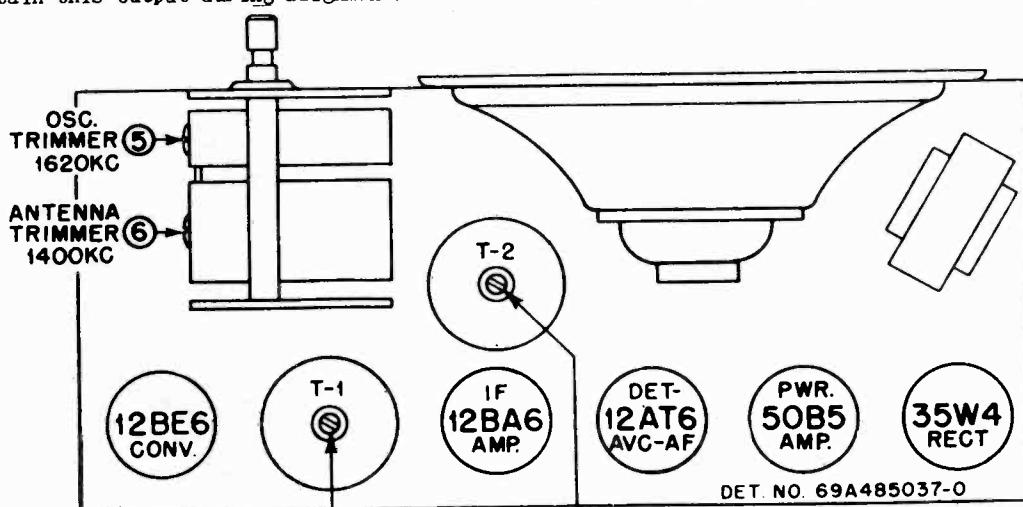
CHASSIS HS-116 TUBE &amp; TRIMMER LOCATIONS
